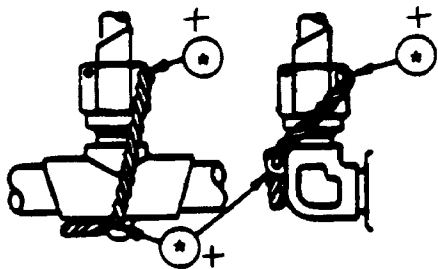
Fittings incorporating wire lugs shall be wired as shown.
